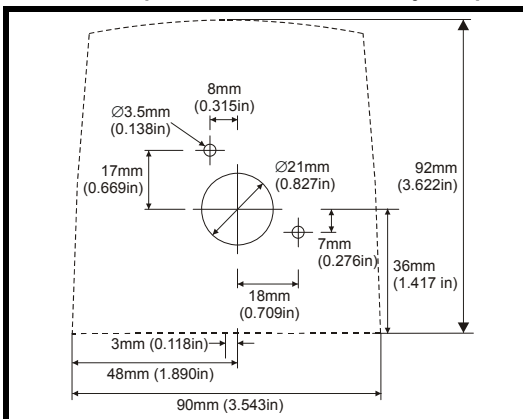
shows the dimensions of the cut out required to mount the MP-Keypad on a panel or cubicle door.
